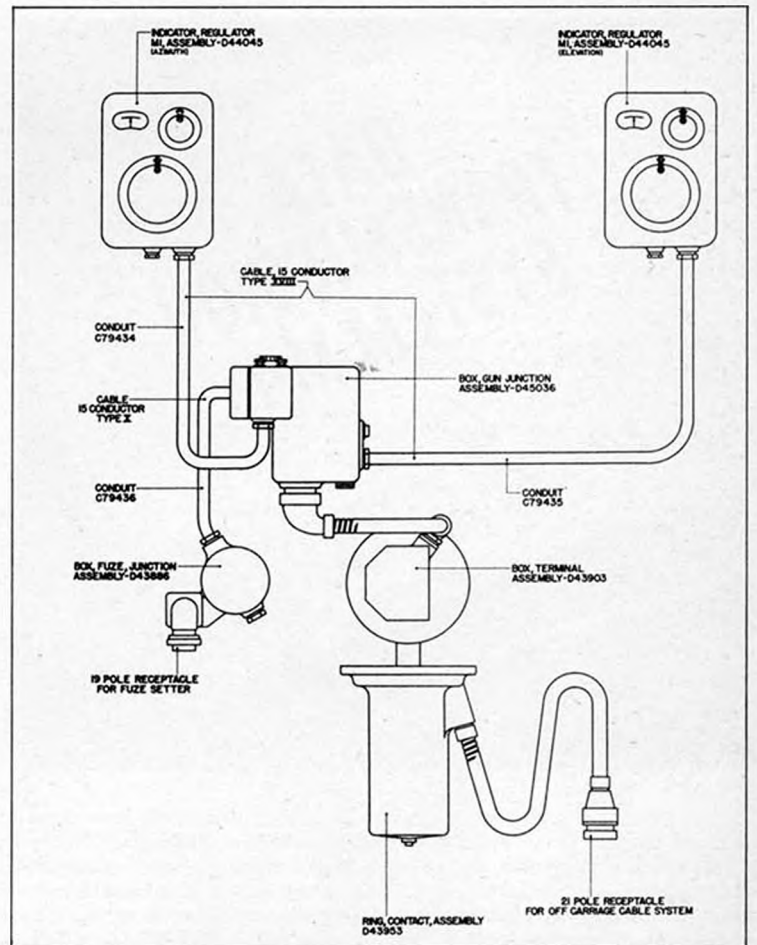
Arrangement of On-carriage Parts for One Gun.
